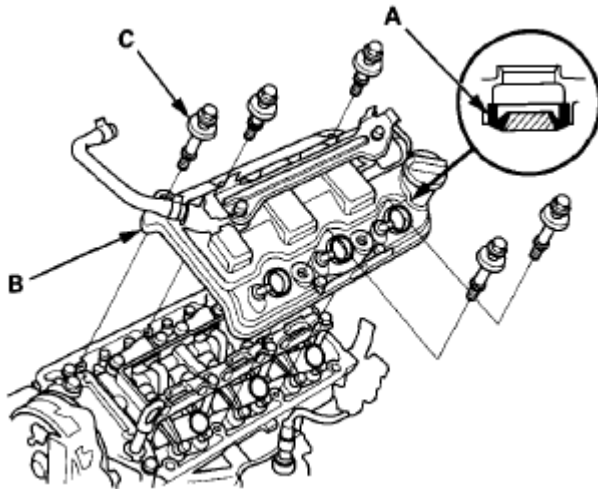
Identifying Spark Plug Seal, Head Cover And Cover Washers
